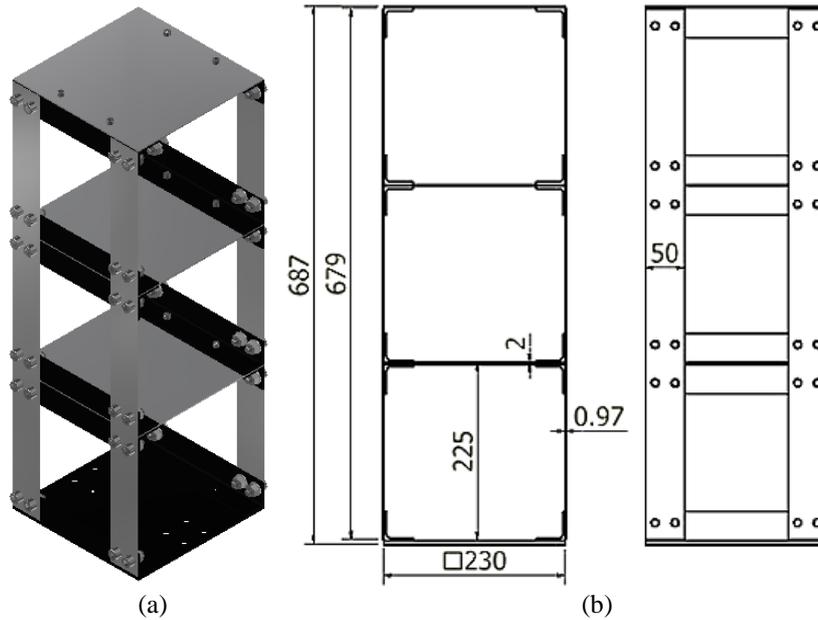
(a) Structure design. (b) Technical drawing of the structure.
